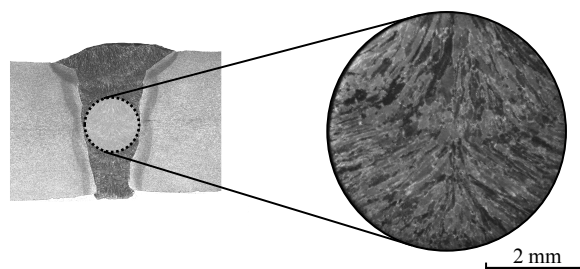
Cross sections of the round bar specimens for all weld metal tensile testing (right) indicate that the specimens have been extracted properly, as shown left.
